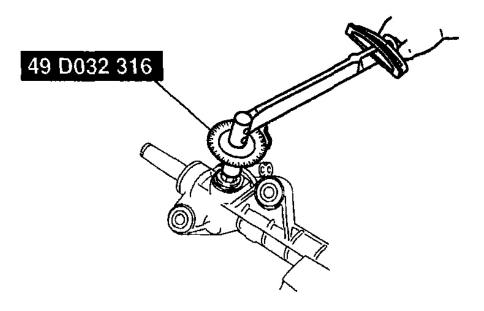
Tightening Pinion Plug Using SST Courtesy of MAZDA MOTORS CORP.
